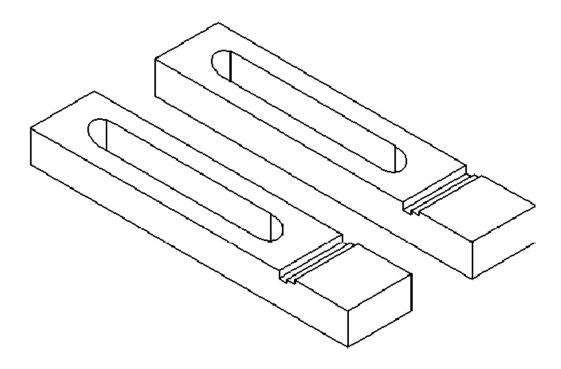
Crankshaft Real Seal Retainer Alignment Fixture 8225 Courtesy of CHRYSLER LLC
